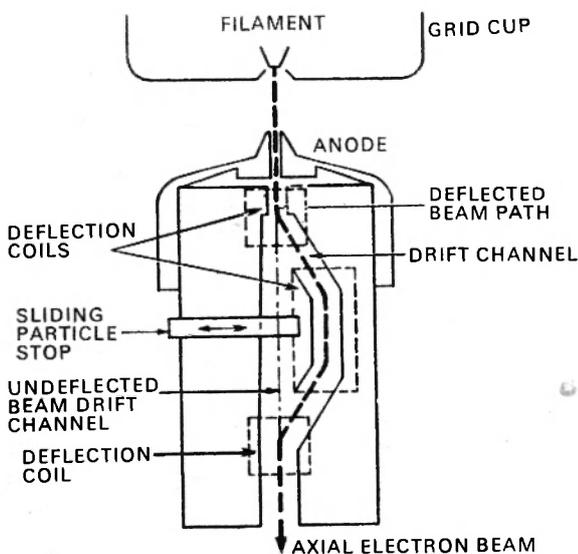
Three bend magnetic trap device developed by The Welding Institute.
